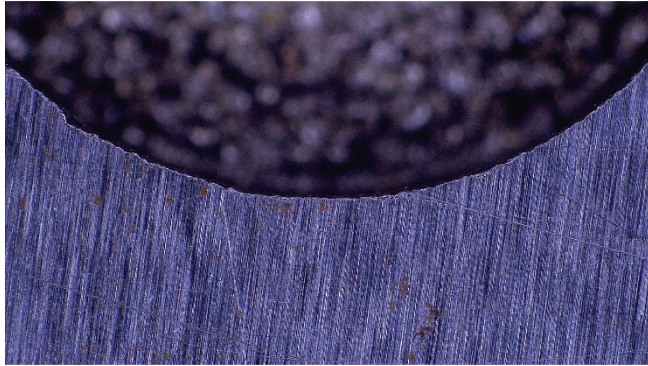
Workpiece surface for a bar stock produced EDM electrode (control, sample 10)
